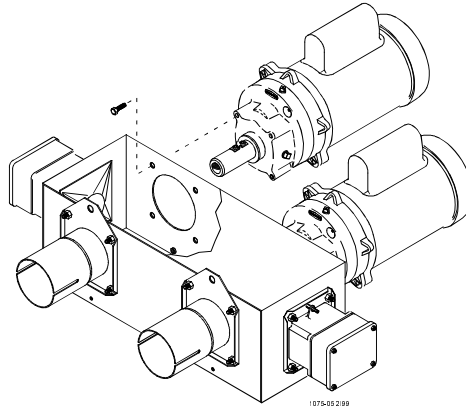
Installing the Anchor Tube Weldments and Switch Assemblies
